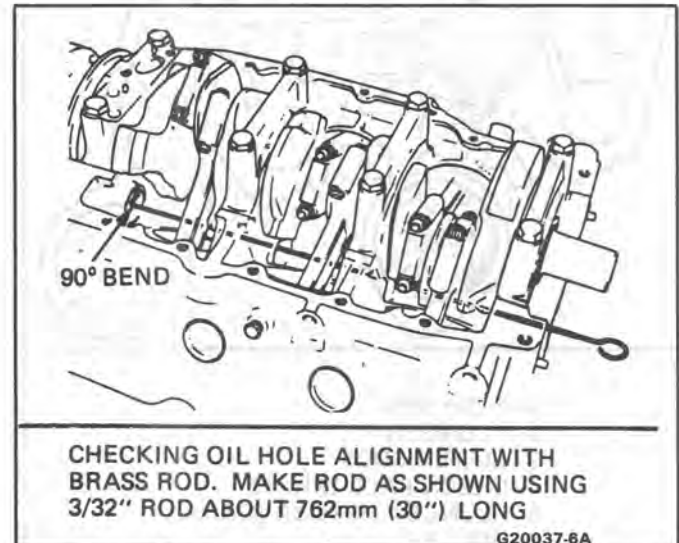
Checking Camshaft Bearing Oil Hole Alignment
